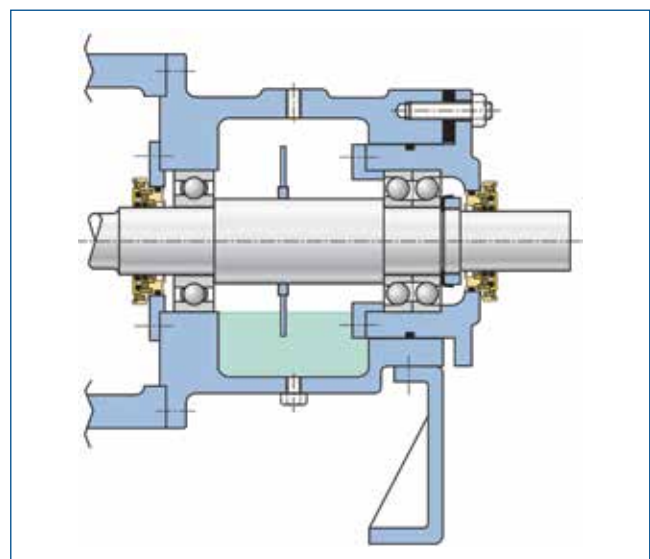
A pump bearing housing equipped with flinger disc and advanced bearing protector seals.
